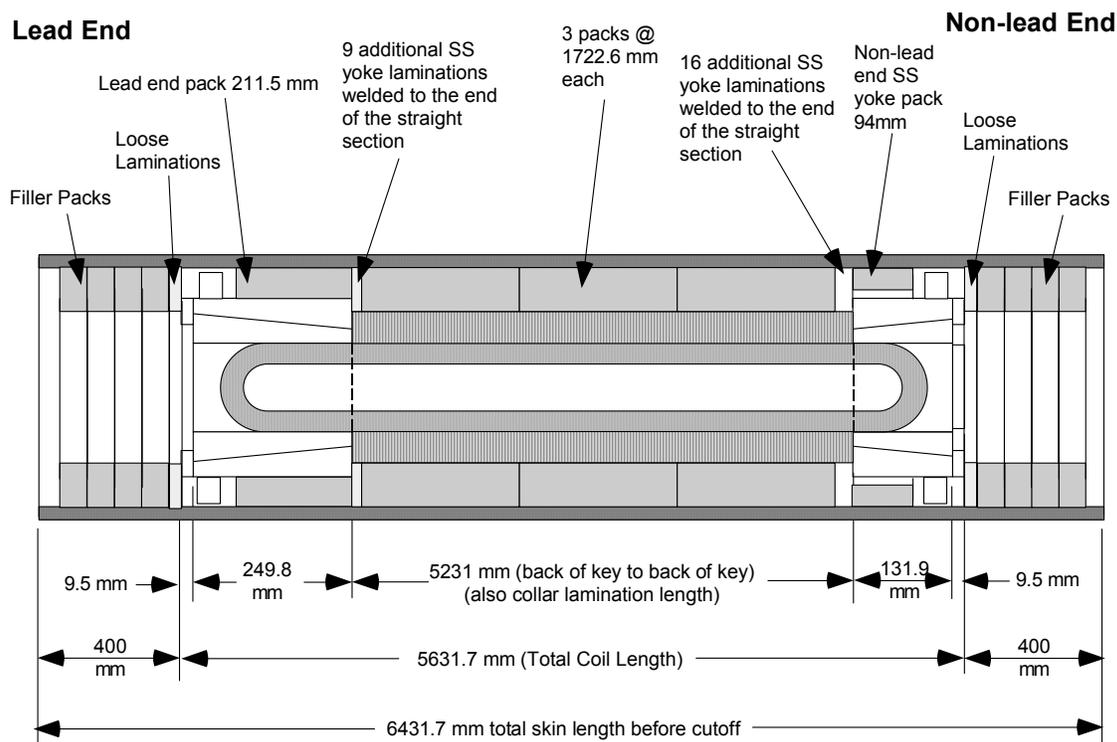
MQXB02 Yoke Assembly Configuration Before Welding
